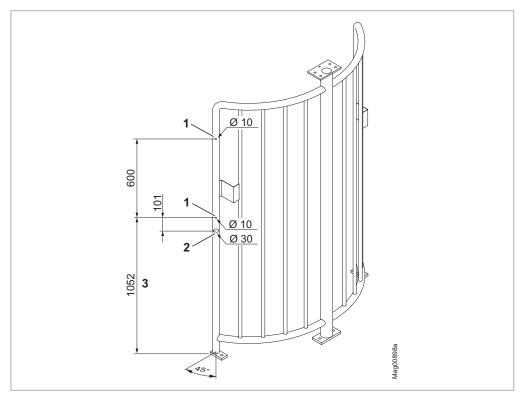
Required holes for mounting pillar (all dimensions in mm)
